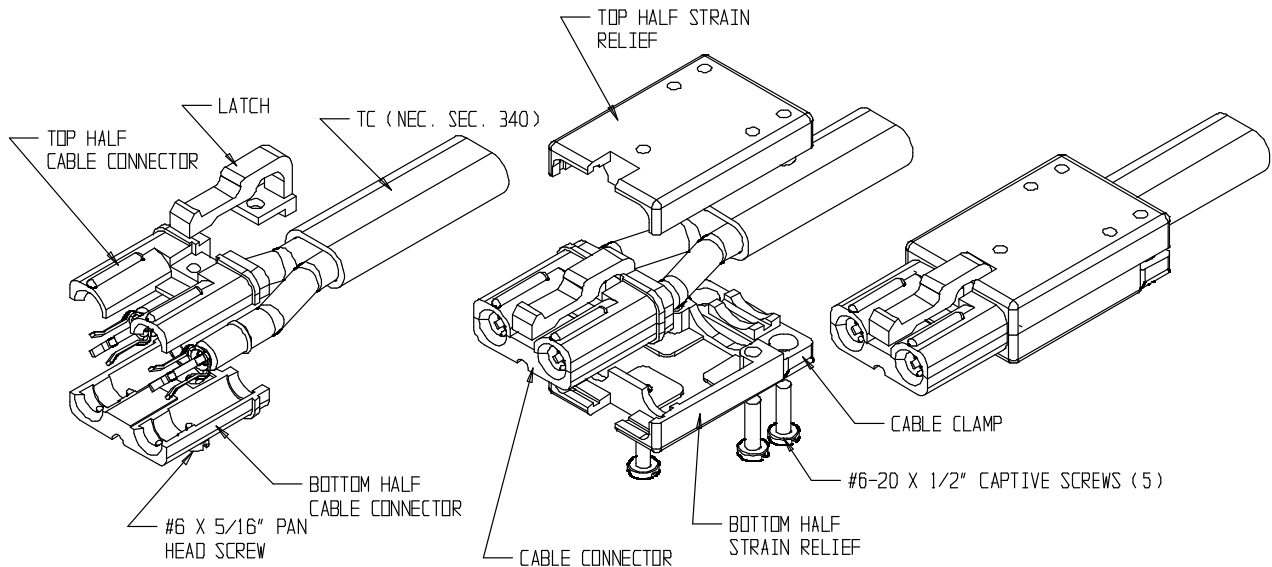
Assembly of Cable Connector FIGURE 5 – Assembly of Cable Connector Strain Relief
